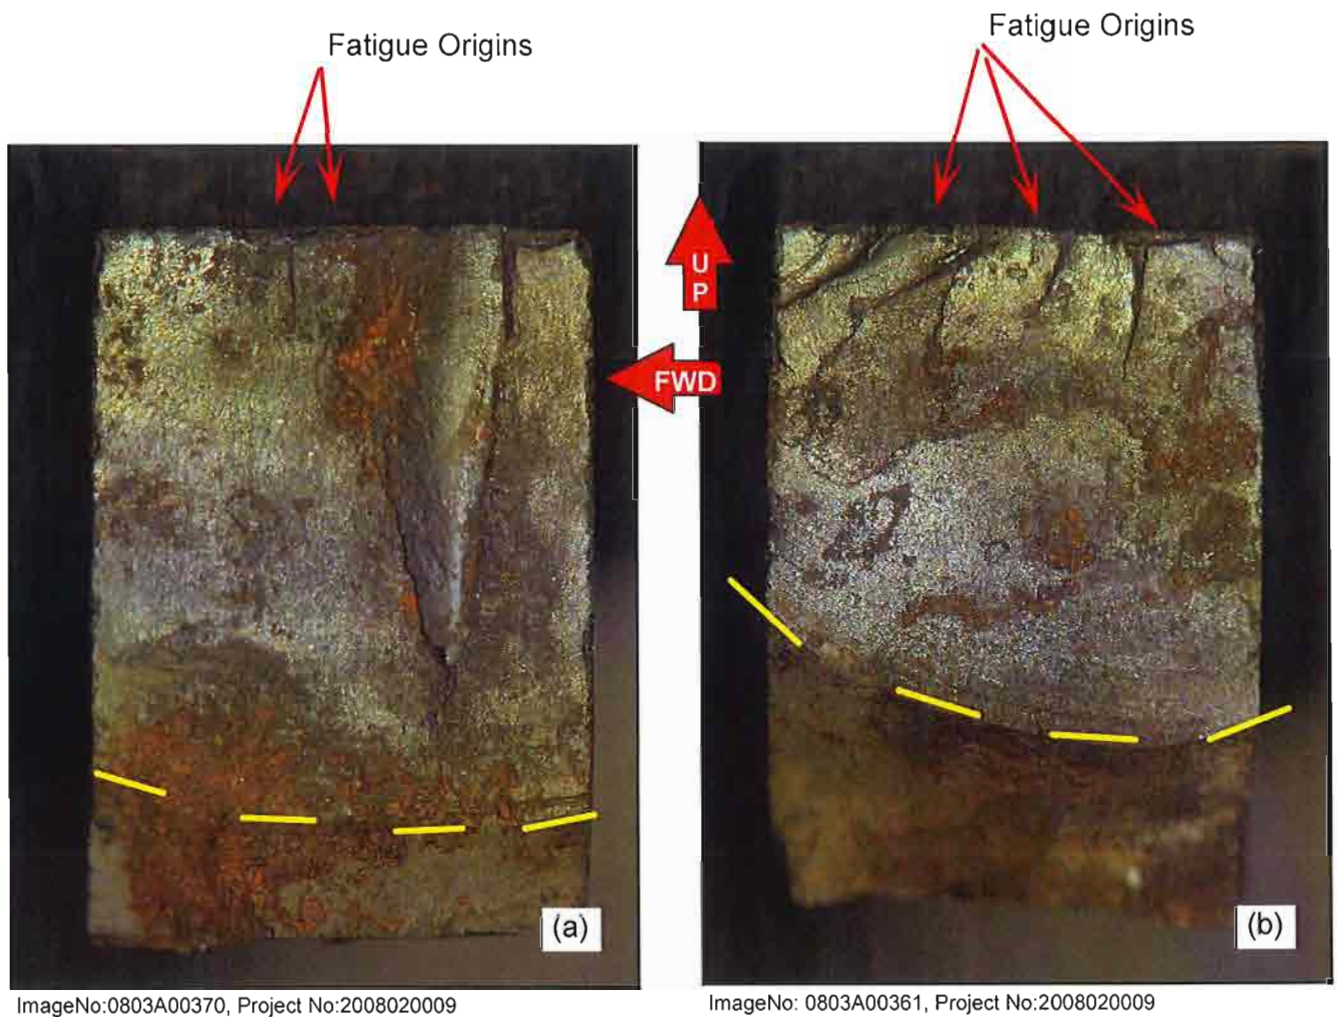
Closer views of the cleaned inboard faces of the forward (a) and aft (b) fatigue fractures in the left wing lower fittings. Fatigue termini are denoted by dashed yellow lines. The bore surface is at top with some of the fatigue origins denoted. Viewed looking outboard.
